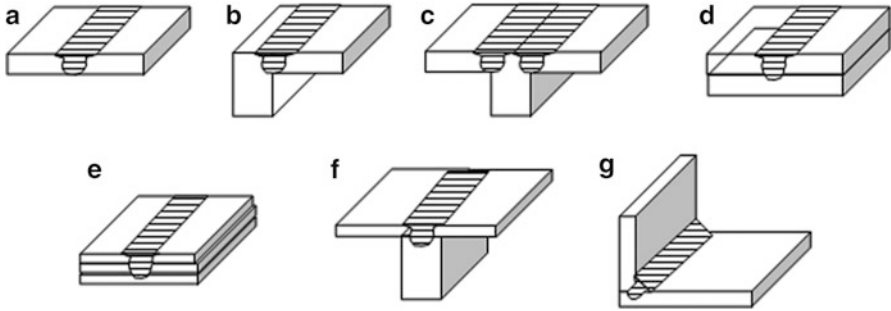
Joint configurations for friction stir welding: (a) square butt, (b) edge butt, (c) T butt joint, (d) lap joint, (e) multiple lap joint, (f) T lap joint, and (g) fillet joint (Mishra and Ma 2005, reprinted with permission from Elsevier)
